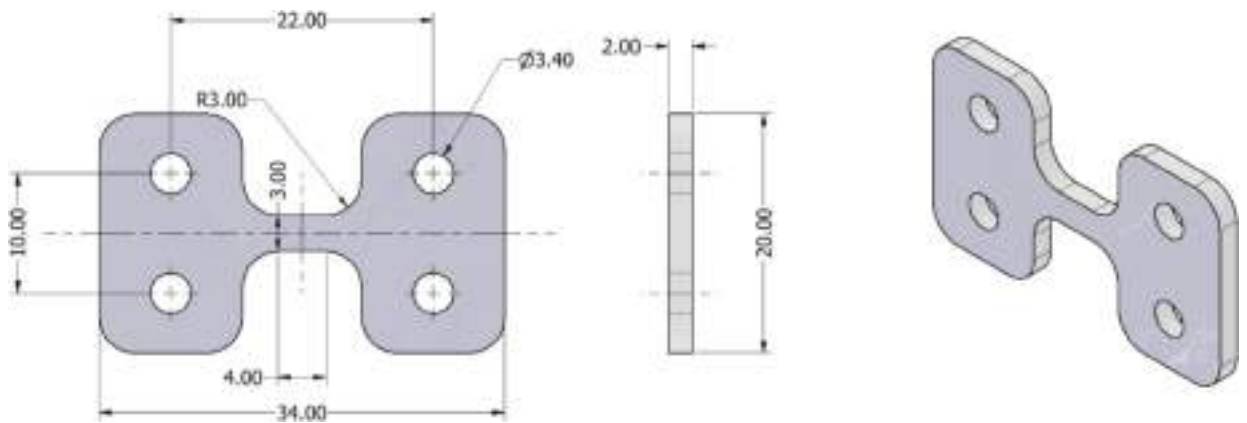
Tensile test sample geometry and dimensions (in millimetres).
